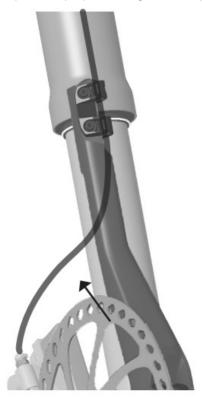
Full view of brake hose routing through brake hose guides and into mast
